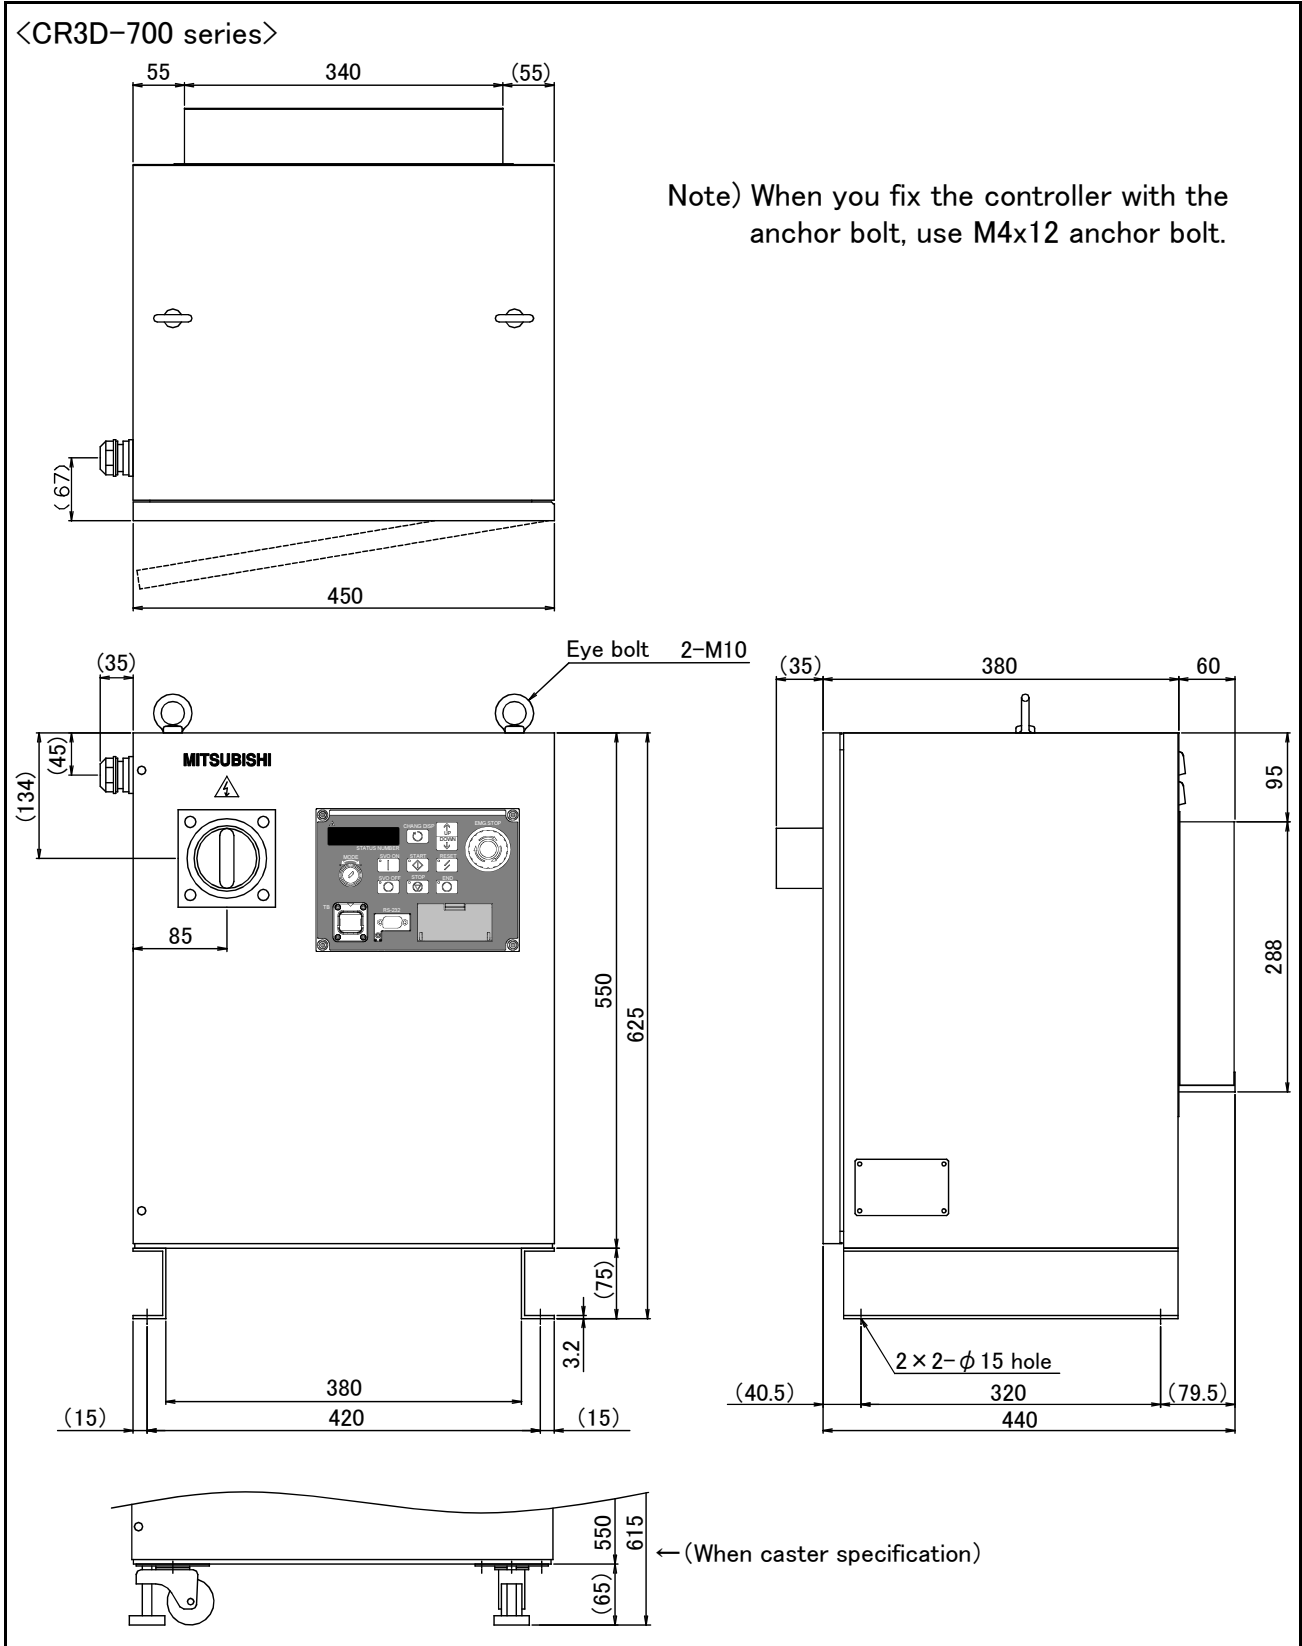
Outside dimensions of controller(CR3D-700)
